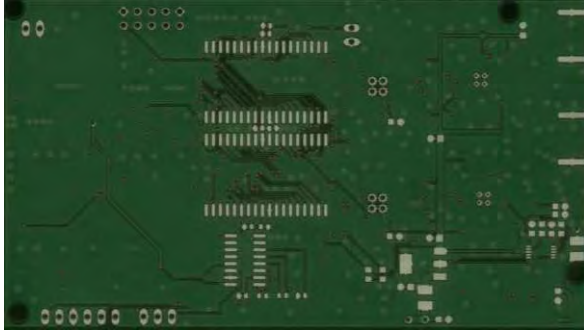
Revision C PCB bottom layer showing RAM footprints
